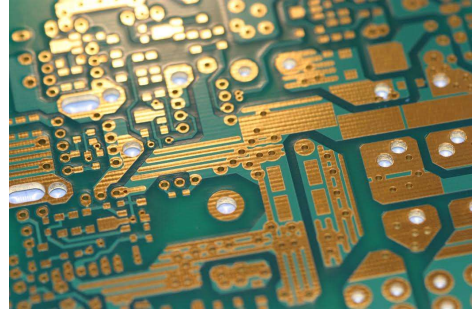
, the picture shows PCB and gold within it. (Dzone, 2016)
